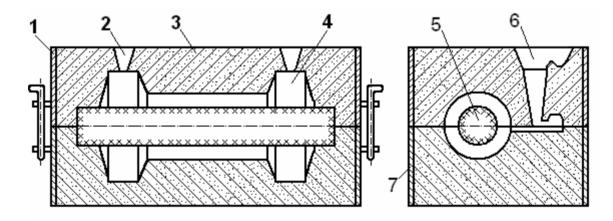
Casting mould: 1 – top flask; 2 – vent pipe (discharge gate); 3 – sand mix; 4 – mould cavity; 5 – core; 6 – gating system; 7 – bottom flask
